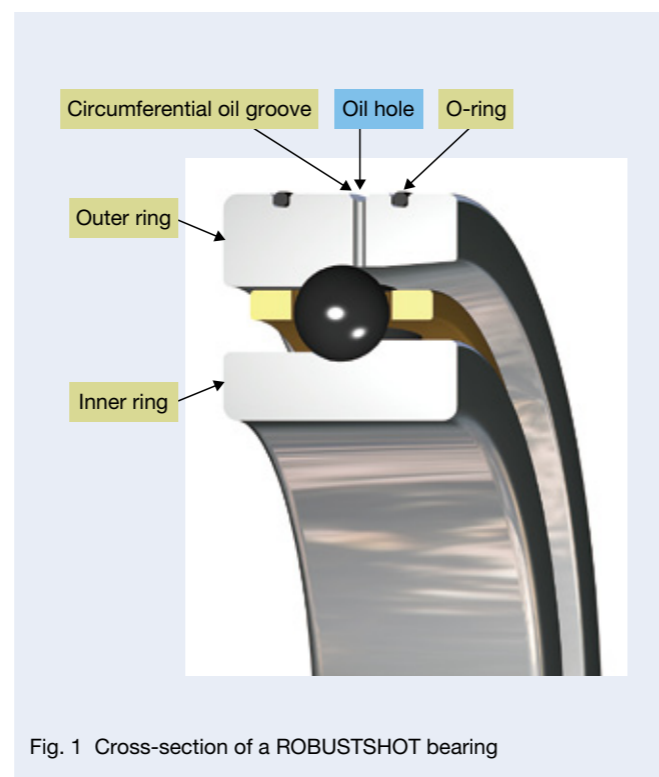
Cross-section of a ROBUSTSHOT bearing
